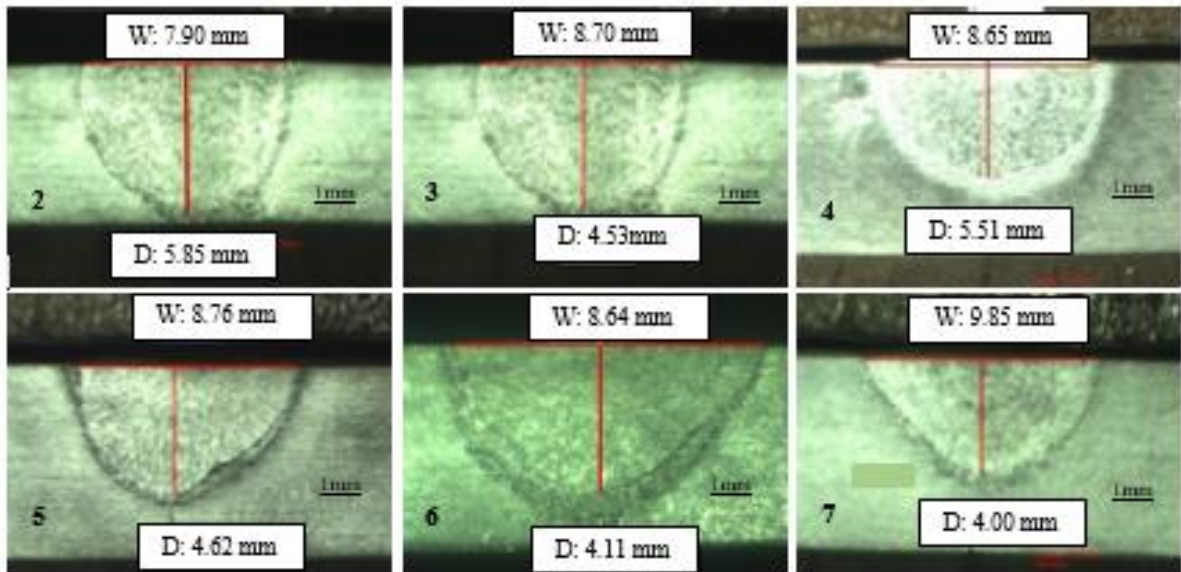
Flux bounded TIG weld bead geometry at varying the gap 2 to 7 mm with SiO_2 flux
